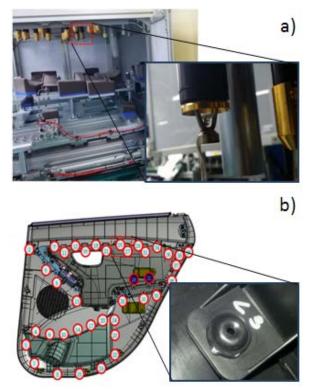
Machine and completed product; a-Developed machine and dies, b-assembled door trim and completed joint
